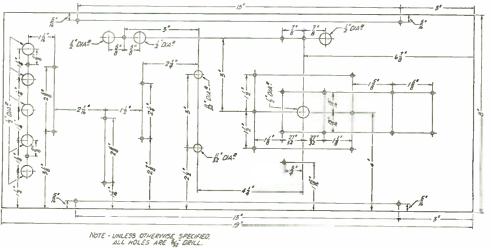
Panel layout with all dimensions is shown here. It should be followed religiously for accuracy
